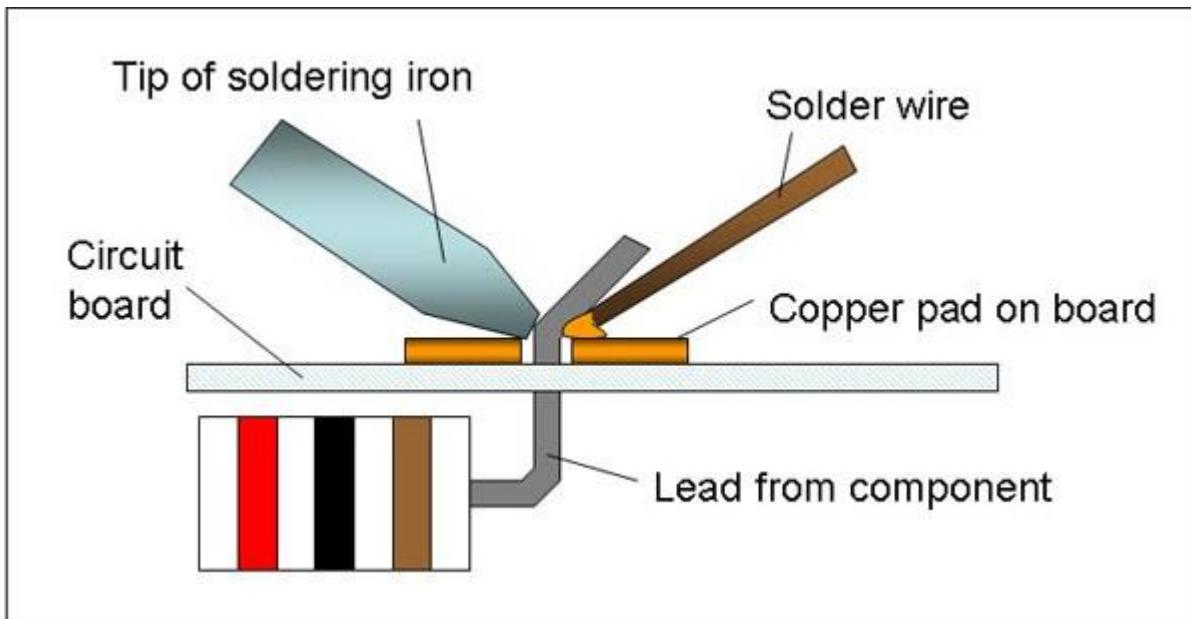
The tip of the soldering iron heats both the copper pad and the lead from the electronic component. Solder melts when placed in contact with the hot metals to be joined.
